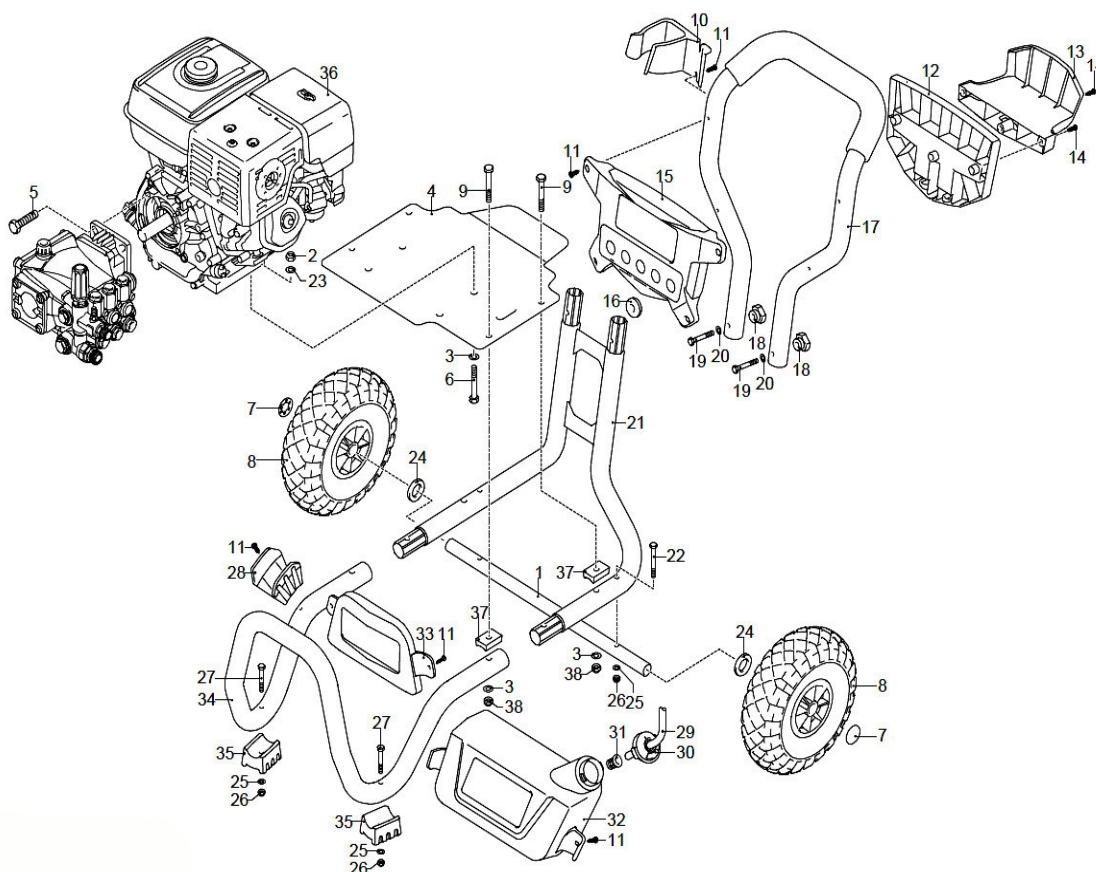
Spare parts drawing 6 HDR-K 96-28 BL
